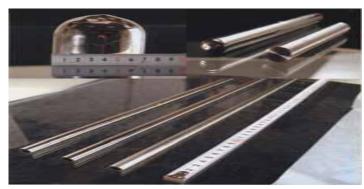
Shape and outer surface appearance of some bulk glassy alloys in massive, cylindrical rod and tube forms produced by water quenching and copper mold casting.
